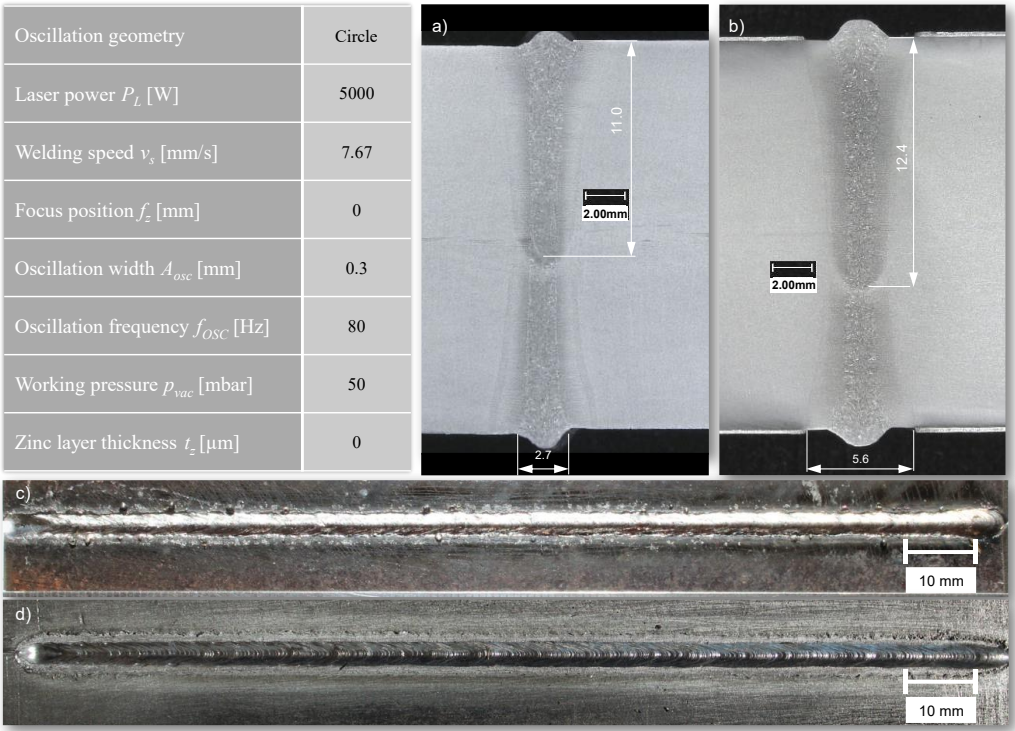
Welding parameters and comparison of (a) macro-section of non-galvanized and (b) surface galvanized sheet and removed zinc from the joining edge ($t_z = 0 \mu\text{m}$), (c) weld seam of non-galvanized and (d) surface galvanized sheet and removed zinc from the joining edge ($t_z = 0 \mu\text{m}$).
